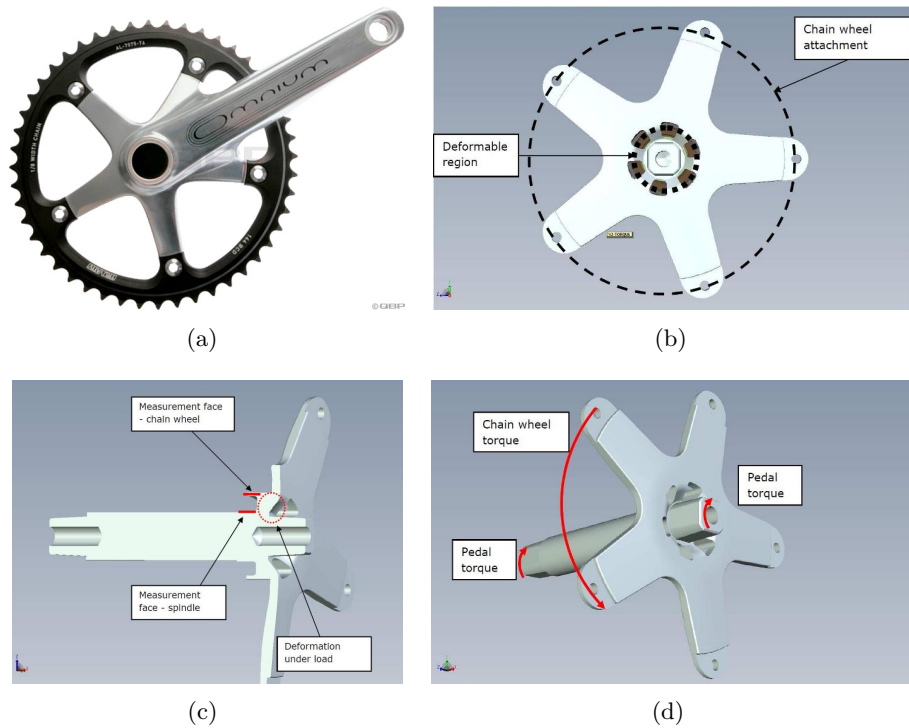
(a) A normal right pedal crank, attached rigidly to the chain wheel. (b) Front view of concept geometry with flexible connection between BB spindle and chain wheel. (c) Cross section of concept BB spindle with measurement faces for measurement of torsion angle. (d) Visualization of torques on concept BB spindle with flexible connection between spindle and chain wheel.
